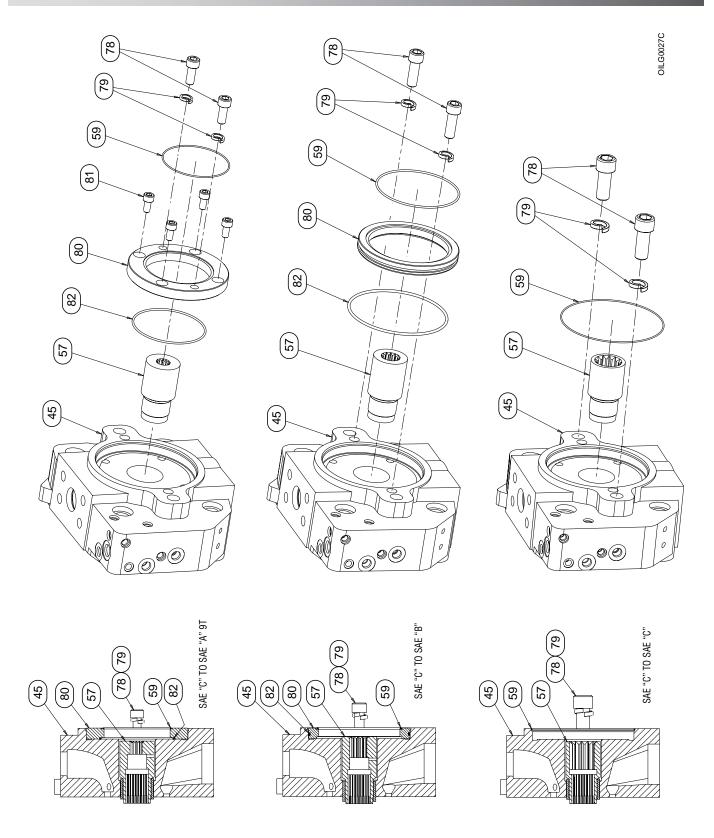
C. Exploded Parts Drawing for PVM-065/-075 B-Frame (519272-202 sheet 3)
